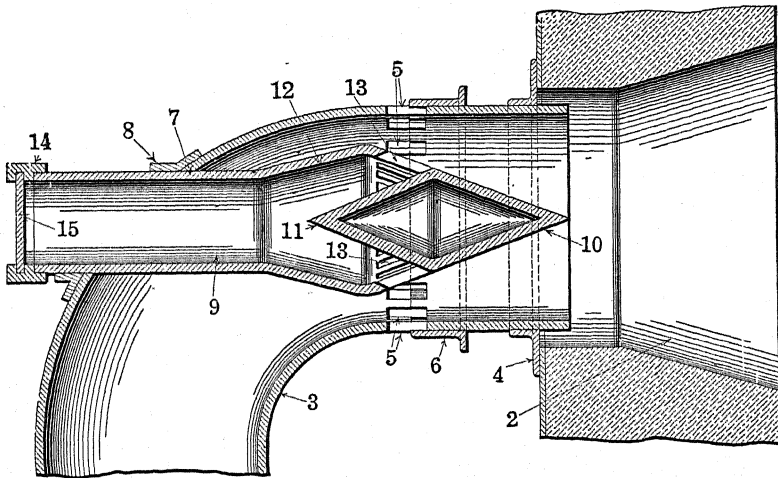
CUT THROUGH BRADSHAW STOVE BURNER.
